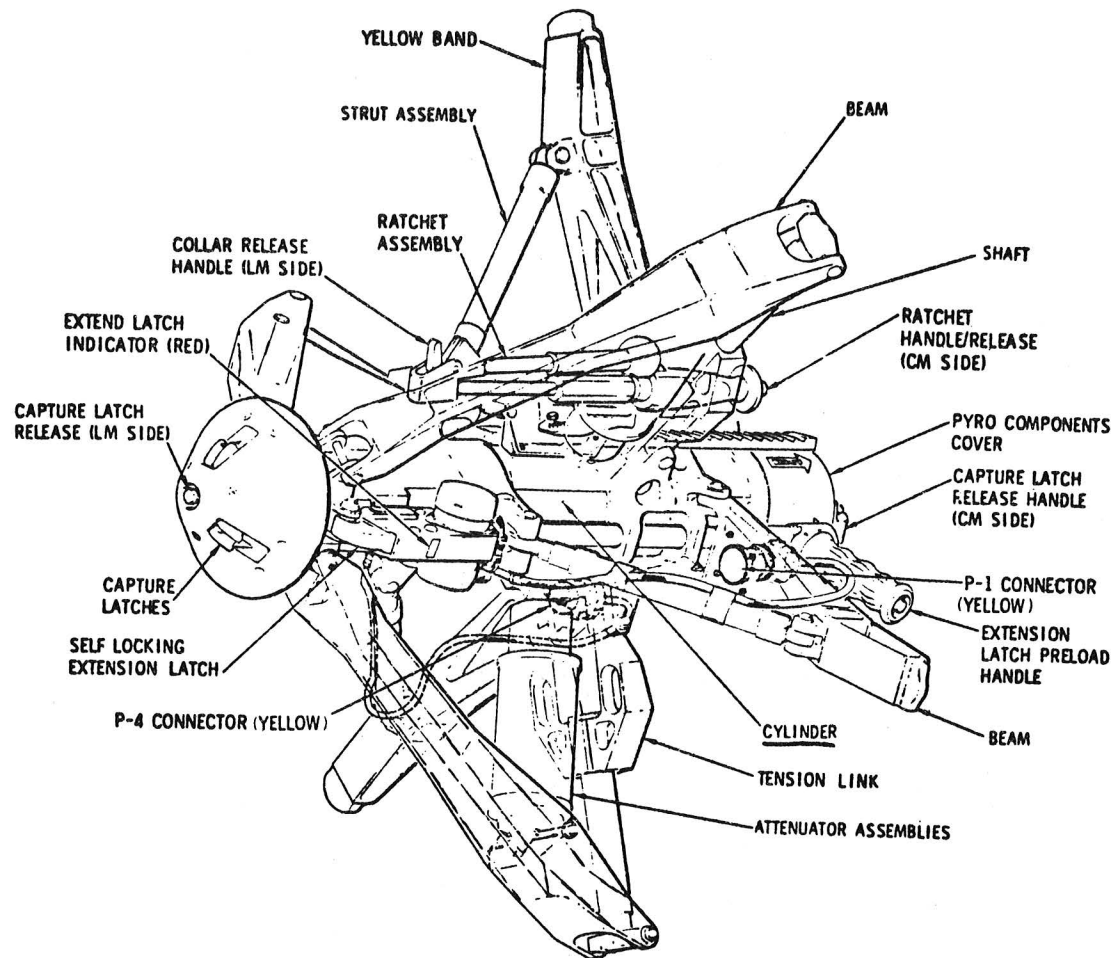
DOCKING PROBE ASSEMBLY.
